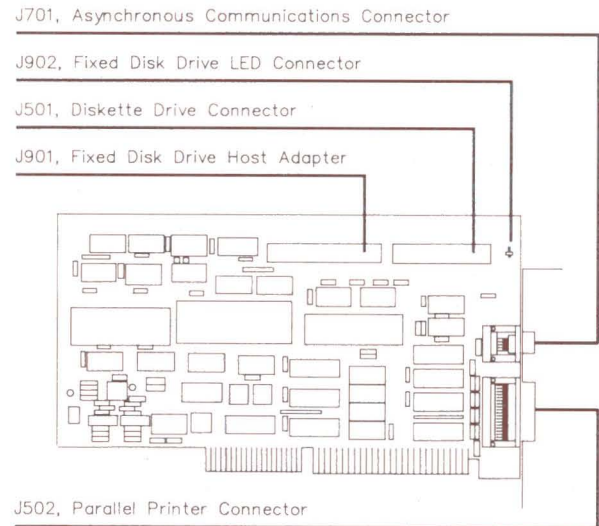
Multipurpose Fixed Disk Controller Board Connector Locations
